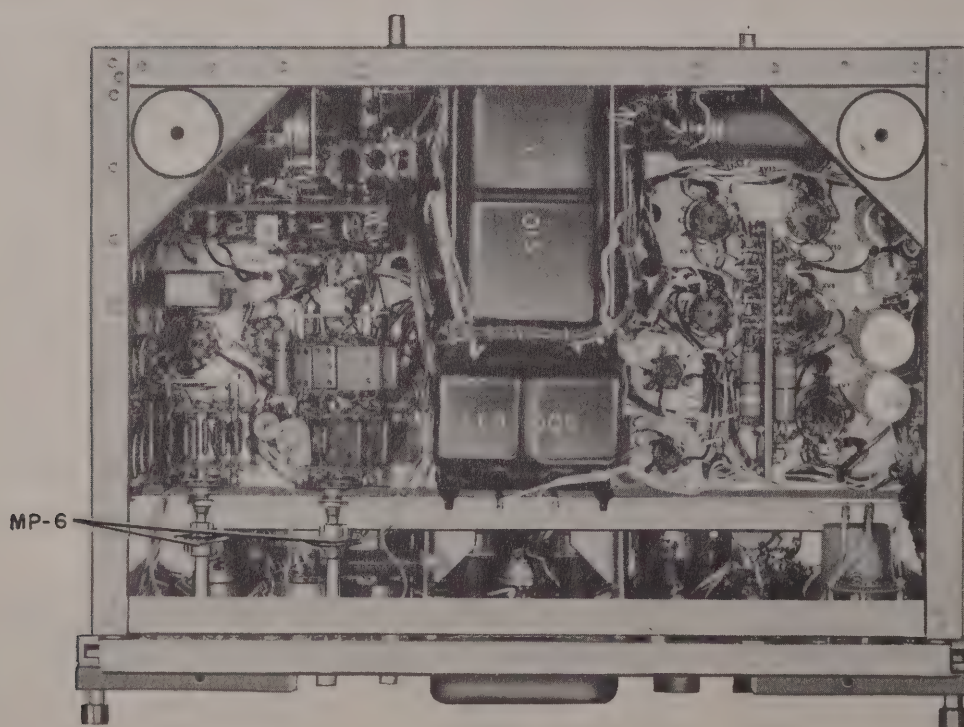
Oscilloscope OS-51/USM-24C, Bottom View without Case
